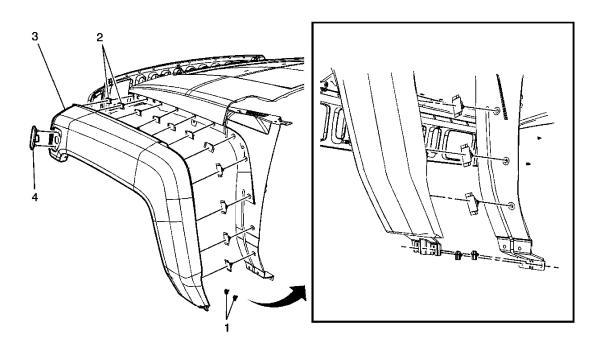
Wheel Opening Flare Replacement - Front Courtesy of GENERAL MOTORS CORP.
